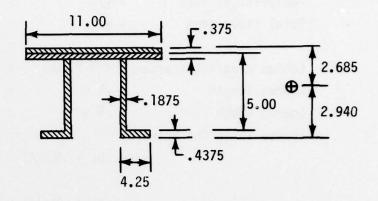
Section properties and cross section for center beam element of HEGS-20.
